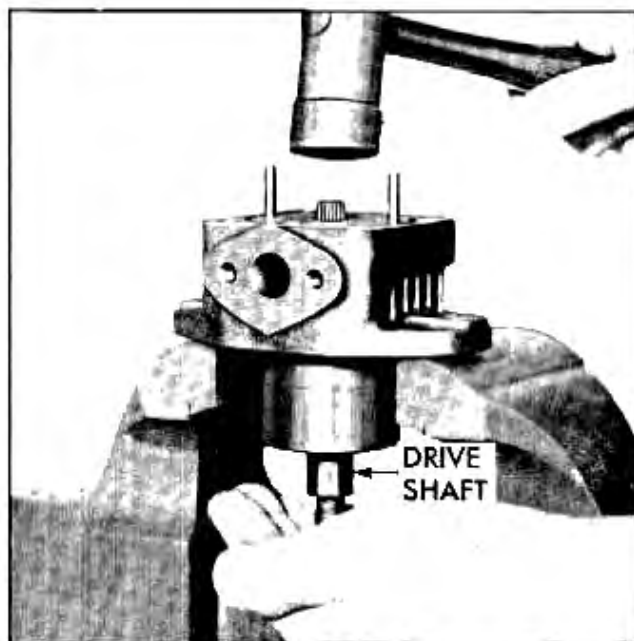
Removing Pump Drive Shaft and Bearing from Pump Body
